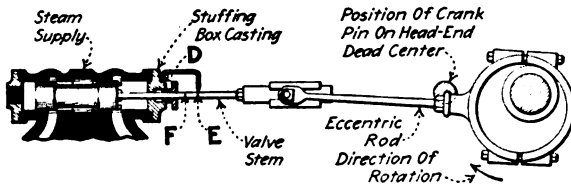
Locating prick-punch marks, for future valve settings, on valve stem and stuffing box. (Engine on head-end dead center.)
